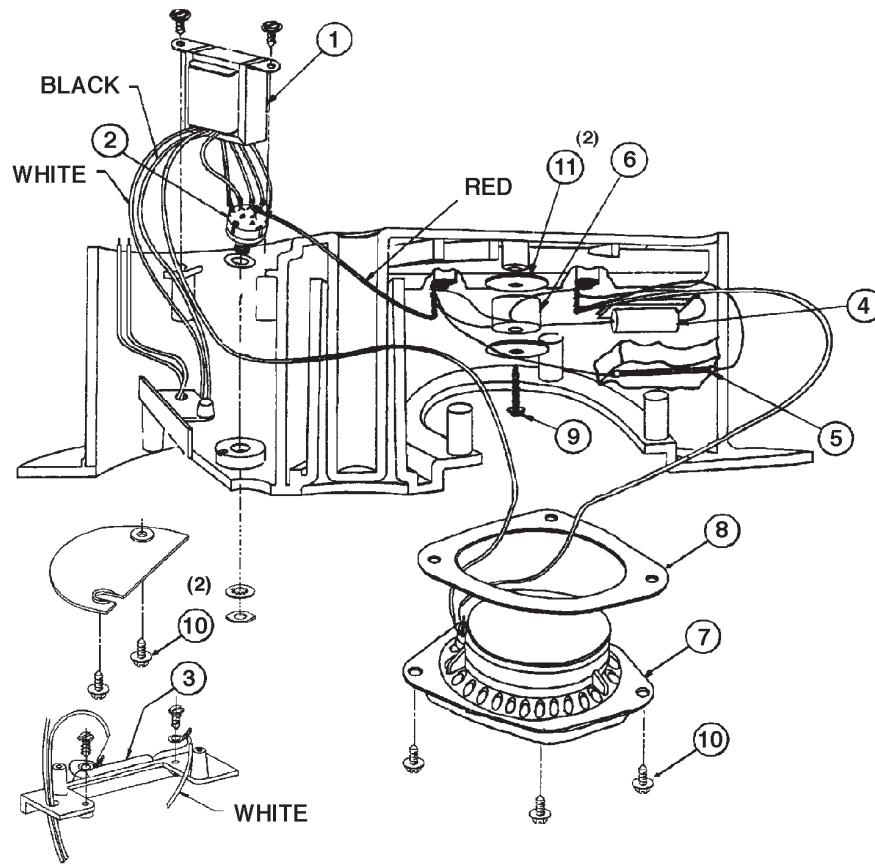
102® Flush-Mount Non-RoHS Loudspeaker Exploded View
